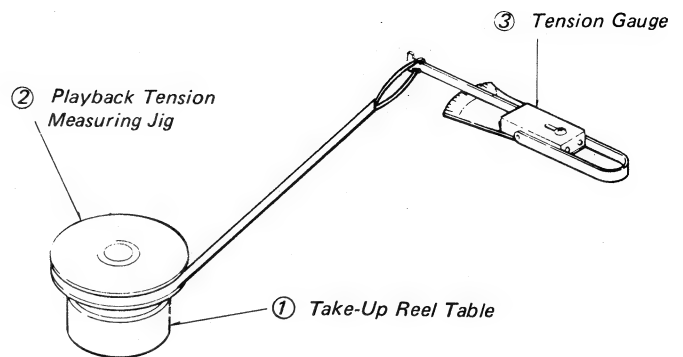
Recording and Playback Take-up Torque Checking.
